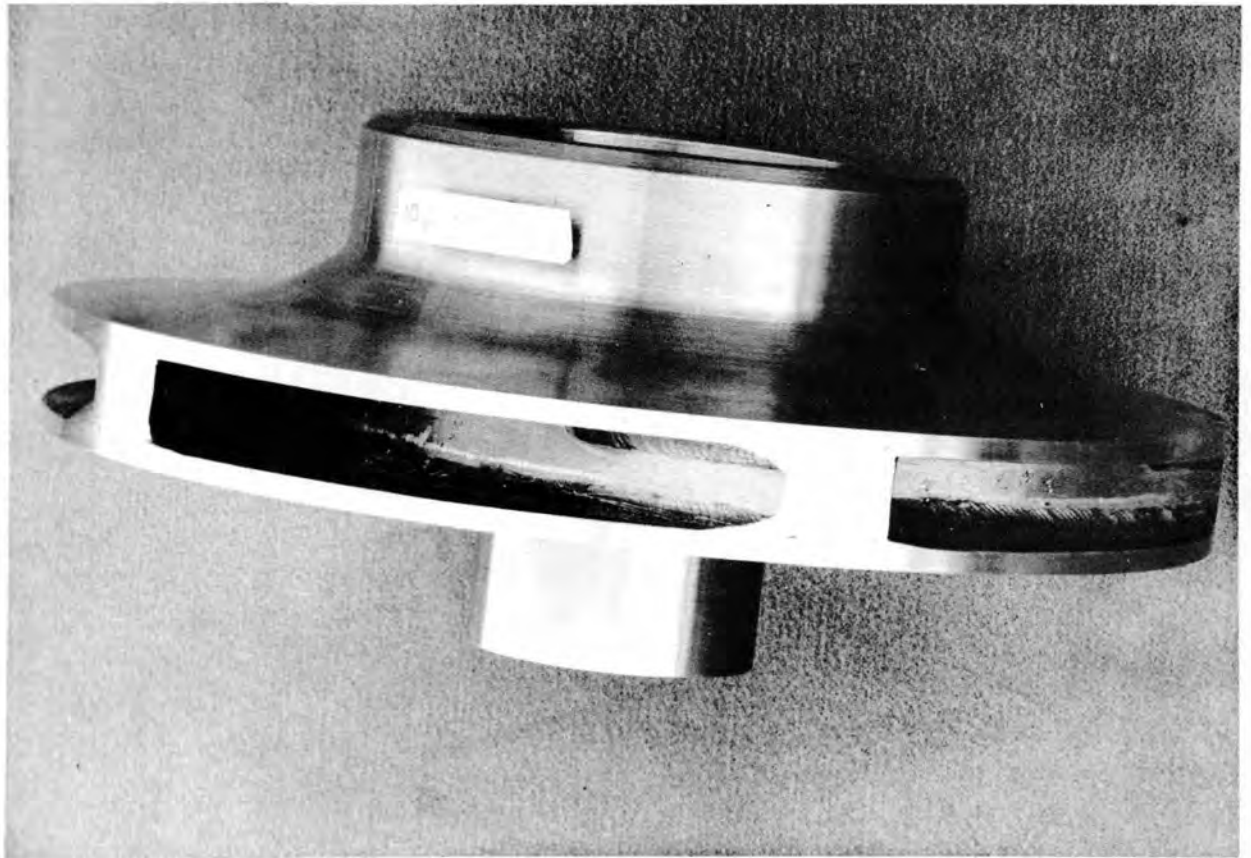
(Y-10794) Completed Impeller after Welding, Stress Relieving, and Final Machining.
